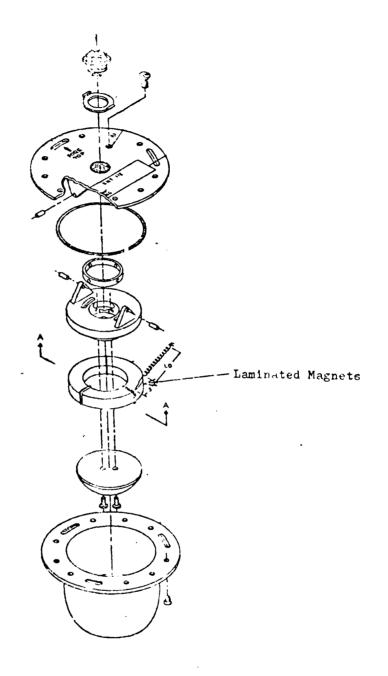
Flux Detector, Exploded View [4:5-3].
